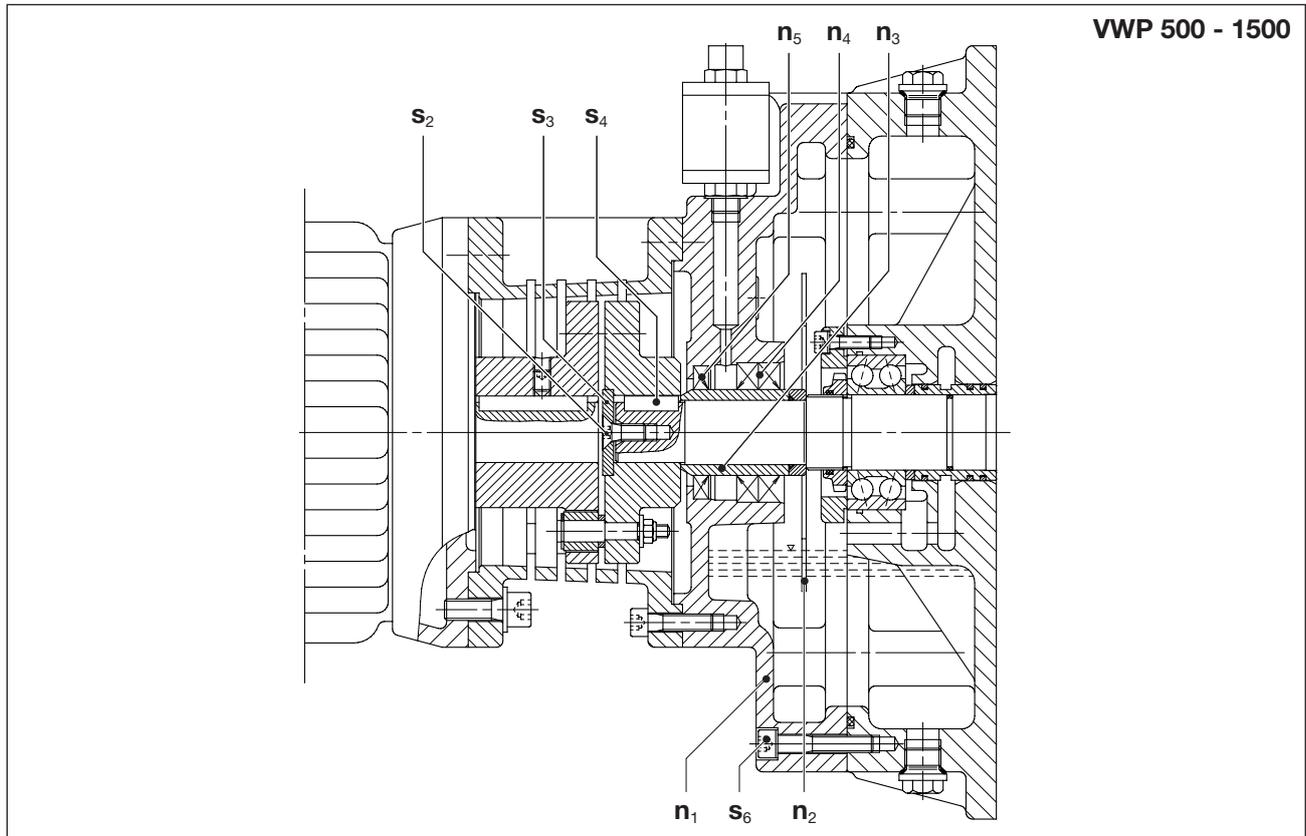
Changing of the shaft sealing rings and the shaft wearing sleeve VWP 500 - 1500
